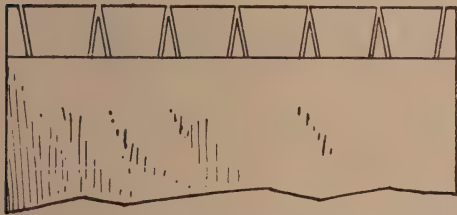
Dovetail Sockets Sawn in on Front and Back Piece
